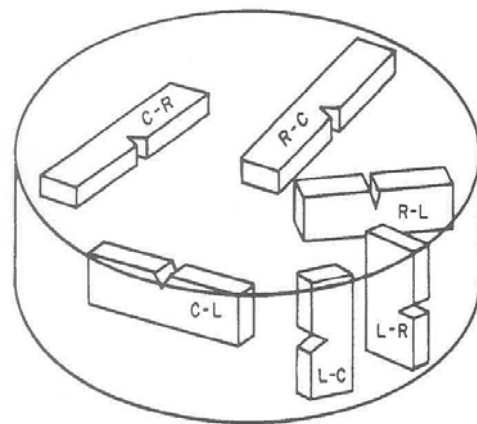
(b). Typical principal fracture path directions for cylindrical shapes.
